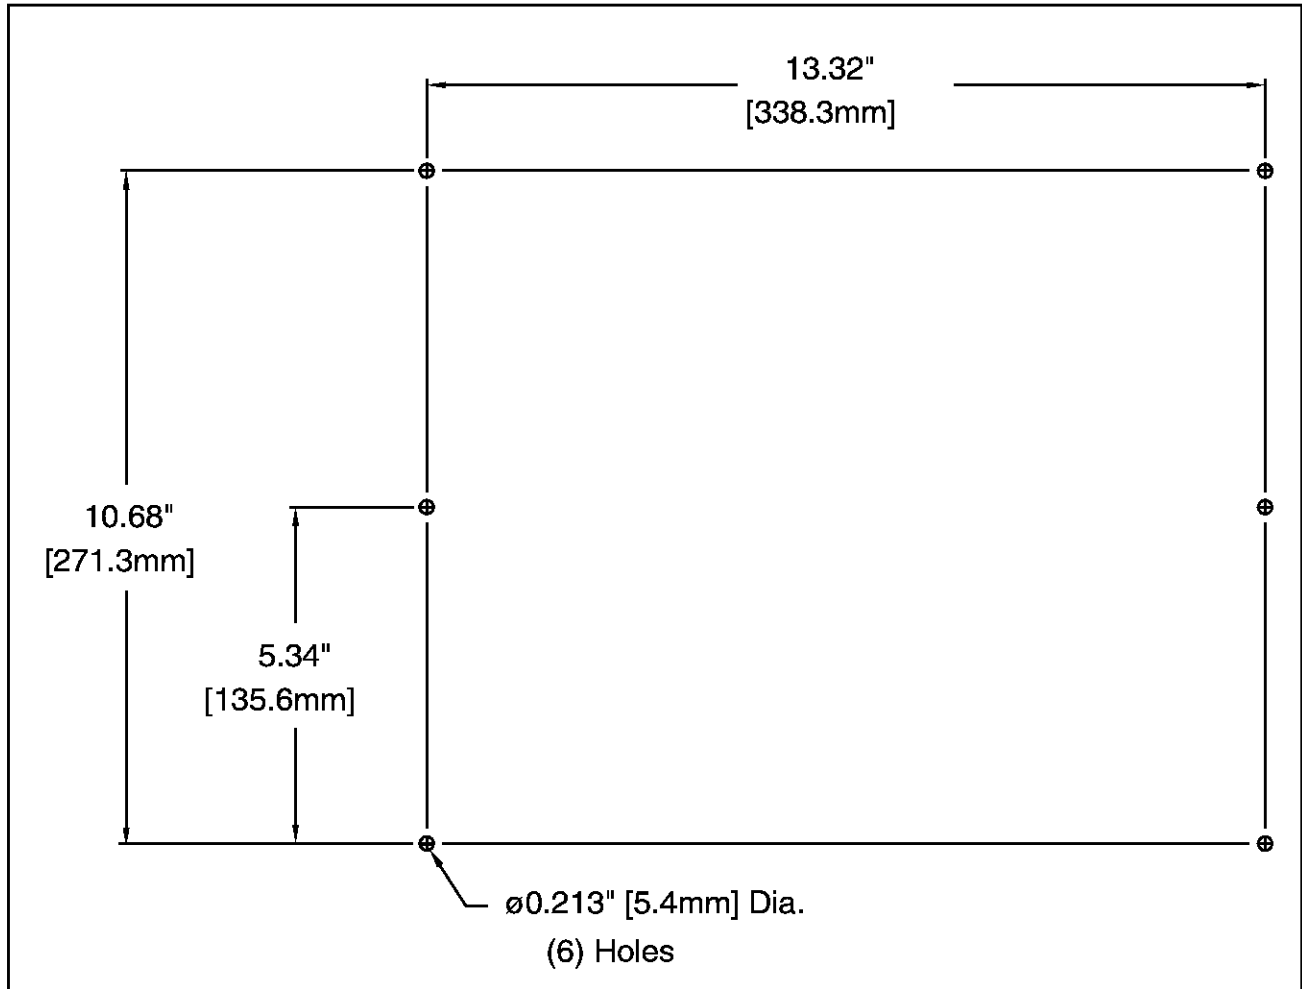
Mounting Hole Pattern for the Inverting Fault Circuit Breaker Assembly
